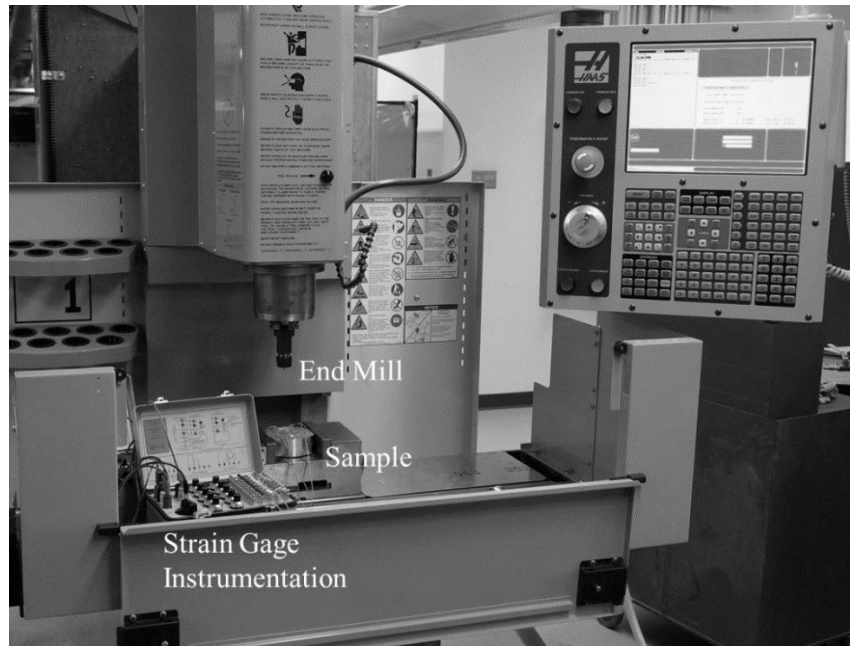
HAAS CNC Mill With a Sample Ready for the Hole-Drilling Procedure. [85]
